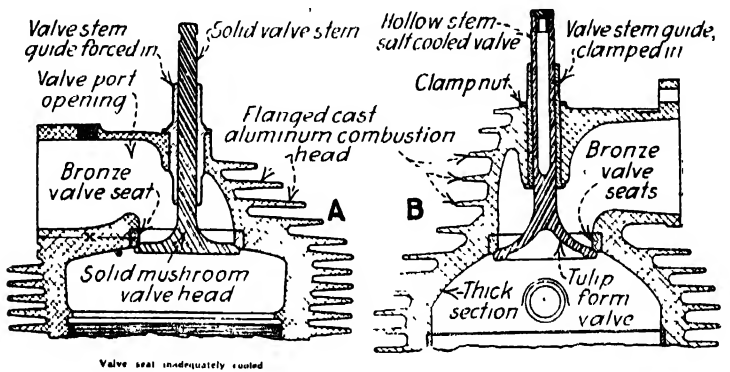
Air-Cooled Cylinder Combustion Head Forms. A—Valve Seat Inadequately Cooled. B—Raised Valve Seat a Superior Form. Note Hollow Stem Valve for Salt-Cooling.
